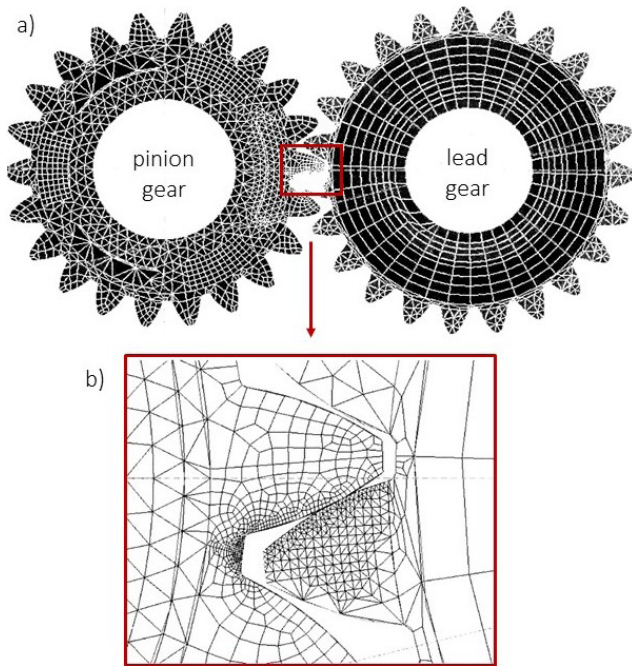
3D FE model of the matching spur gears for tooth root fatigue: (a) whole model; (b) detail in the engagement area, adapted from [17]
